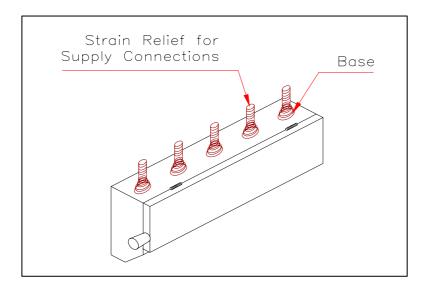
Strain Relief And Hook-Up To Supply Dispenser
